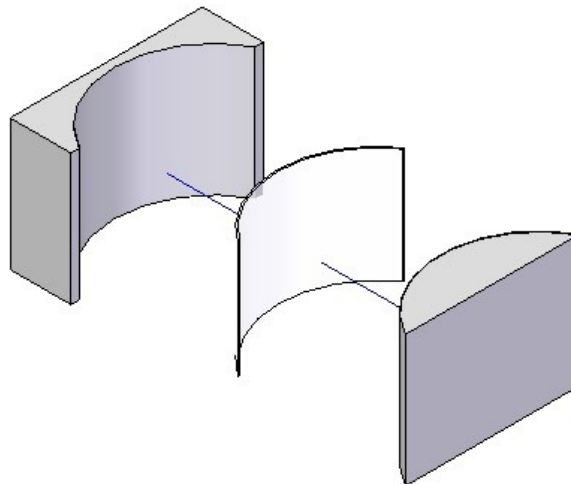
Exploded view of the actuator. The gray parts indicate the foam.
